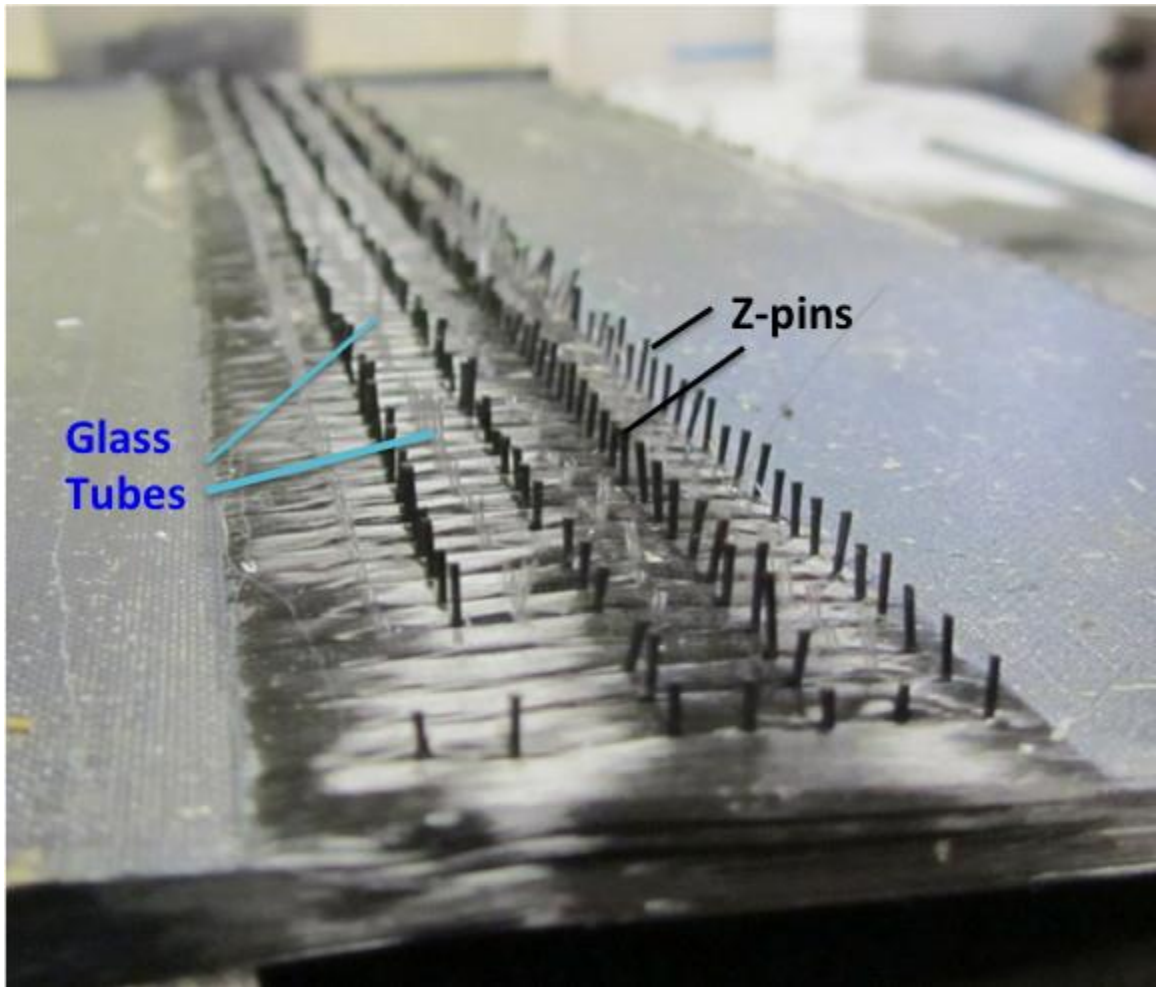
24-ply composite panel with inserted Z-pins and hollow glass tubes
